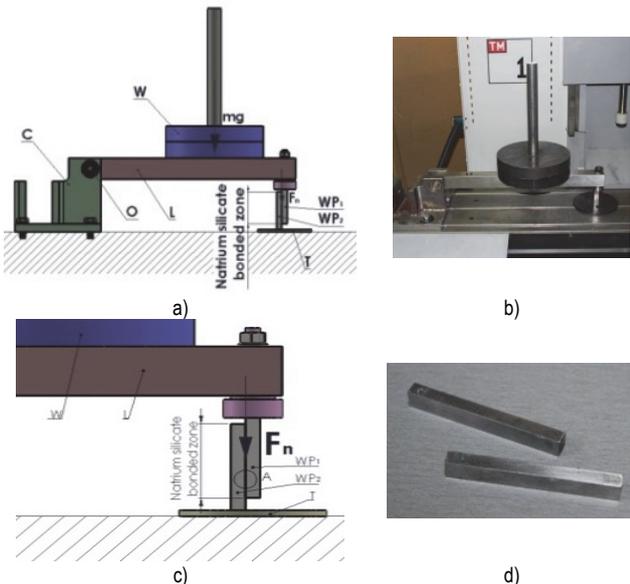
CAD model of purpose-built test device (a); photographic representation of the device (b); CAD detail of the bond breaking zone under the action of shear stress (c); photographic representation of the samples after breaking the bond (d)
